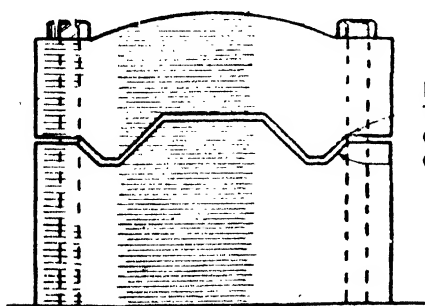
DIE FOR FORMING AIRCRAFT CHANNEL SECTIONS ON A DRAW BENCH
